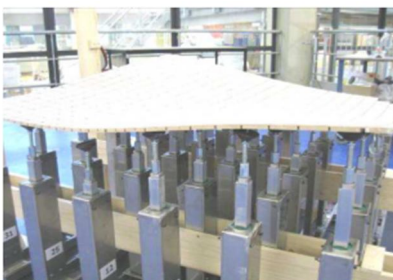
Prototype of a flexible mould built by Rietbergen and vollers
